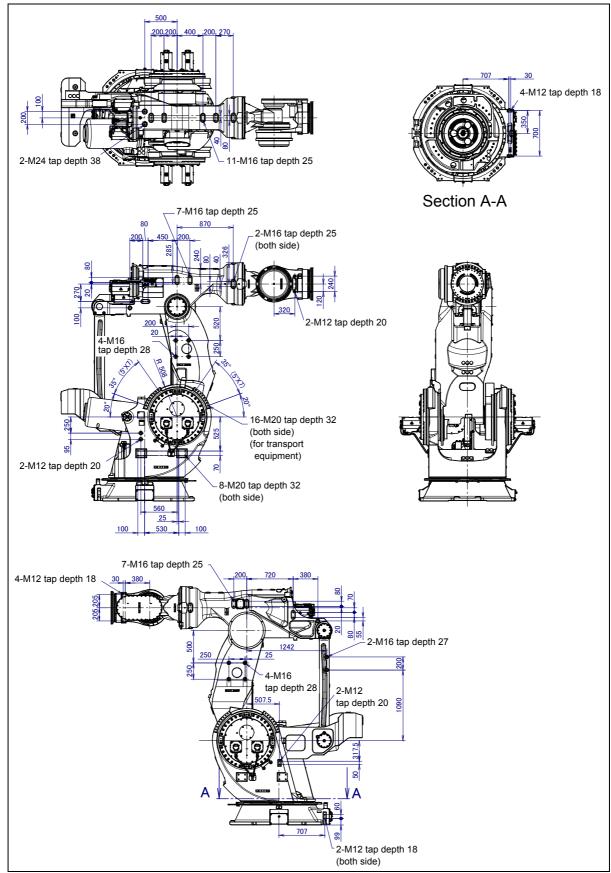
(c) Equipment mounting faces (M-2000iA/2300)
